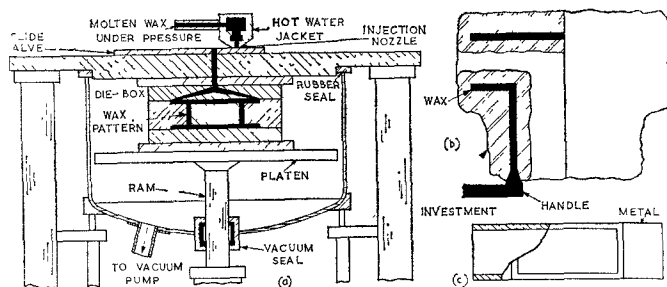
Lost-wax investment casting; (a) vacuum wax-injection machine, (b) wax pattern with refractory investment, (c) finished cast article—an *H* plane, *T* junction.
